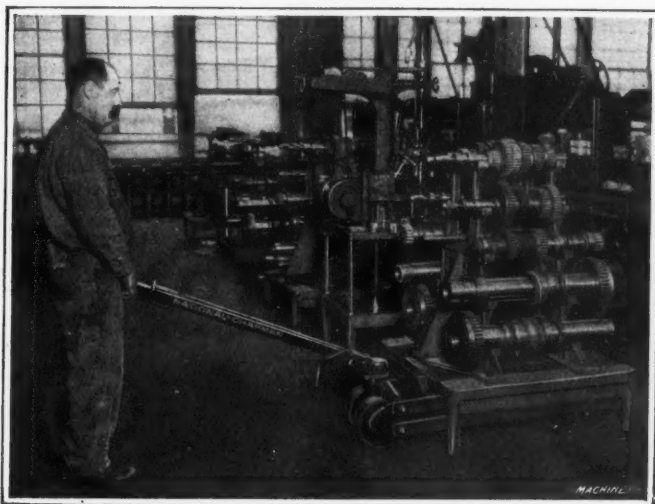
Rack which holds Assembled Shafts for Two Complete Headstocks
